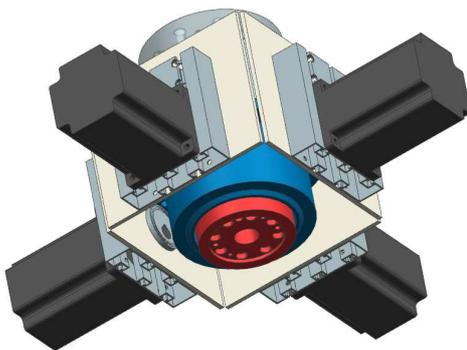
Novel GWDS blow molding head which allows for a further improvement of the thickness distribution of blow molded parts
